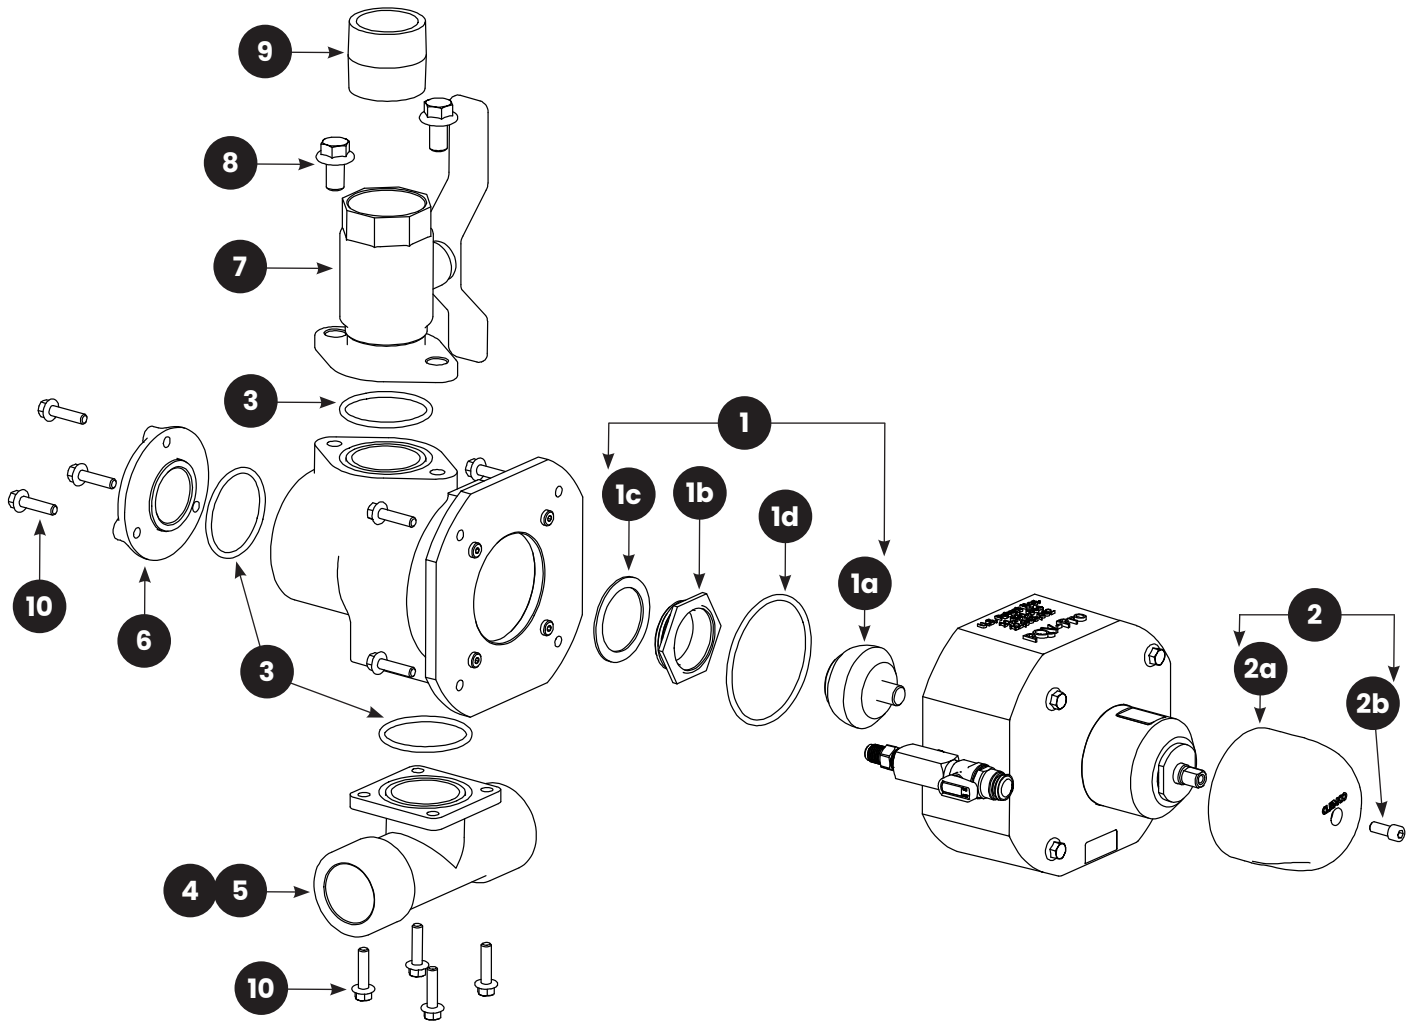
(1) Service Kit—1a: Plunger, 1b: Seat, 1c: Gasket, 1d: O-ring Acuator; (2) Service Kit—2a: Knob, metering, 2b: Screw 1/4" x 5/8" socket head; (3) O-ring 2-1/8" O.D.; (4) Flanged outlet pipe 1-1/4" FNPT; (5) Flanged outlet pipe 1-1/2" FNPT; (6) Cover, cleanout; (7) Valve, 1-1/2" NPT flanged ball; (8) Bolt, 7/16, 14 x 3/4" hex; (9) Nipple, 1-1/2" NPT close, schedule 80; (10) Bolt, 1/4, 20 x 1" flanged hex
